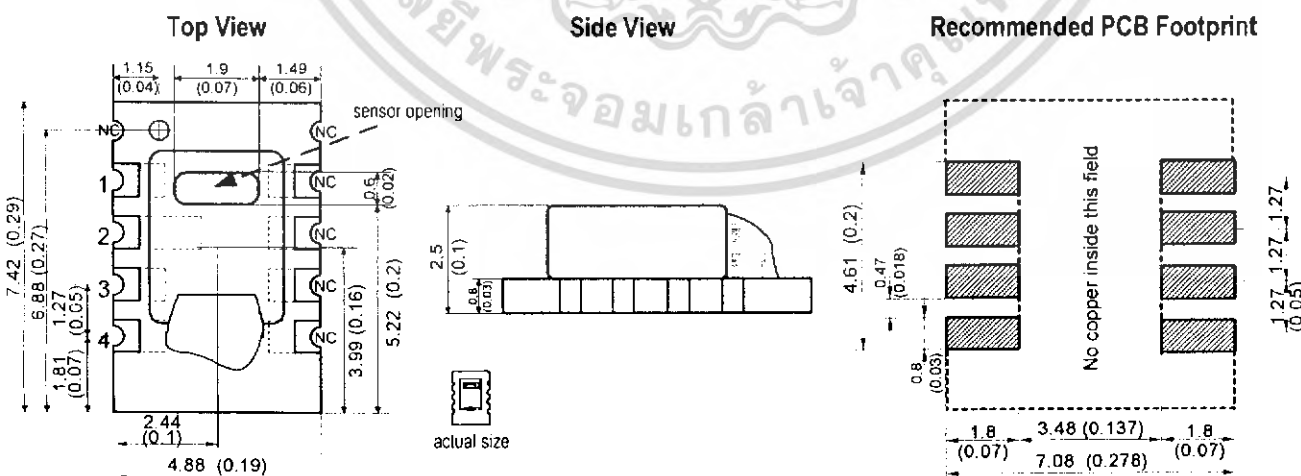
SHT1x drawing and footprint dimensions in mm (inch)
